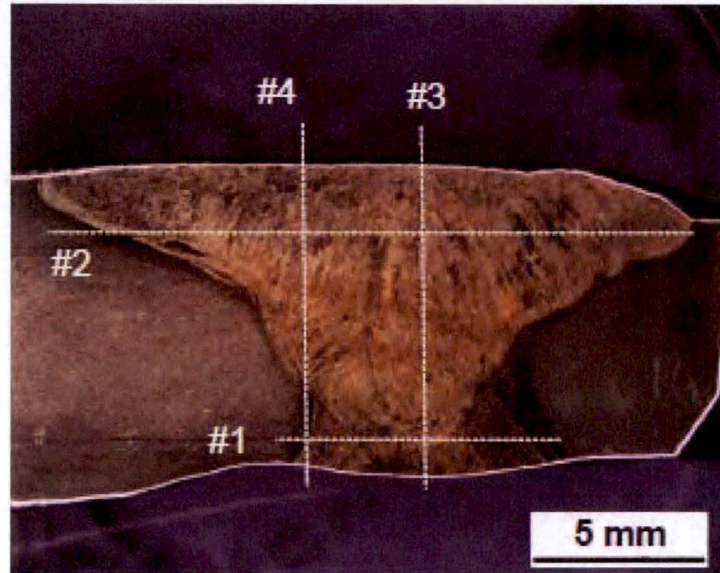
Sample 1 – 30-inch Weld Cross-Section
